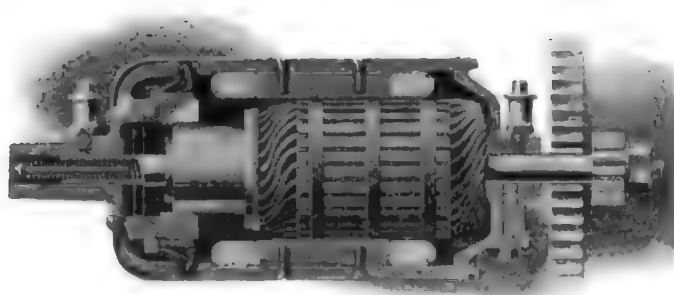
Sectional view of old Bosch-Rushmore starter. It is still a feature of Bosch products but has been improved decidedly
